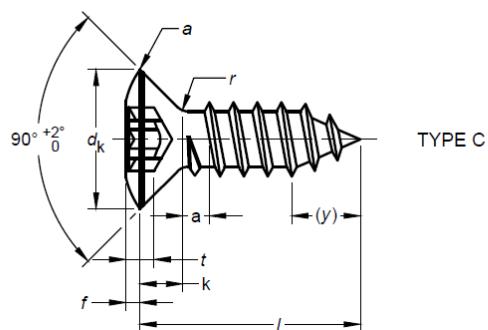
(C) RAISED CSK HEAD (TYPE C END)
